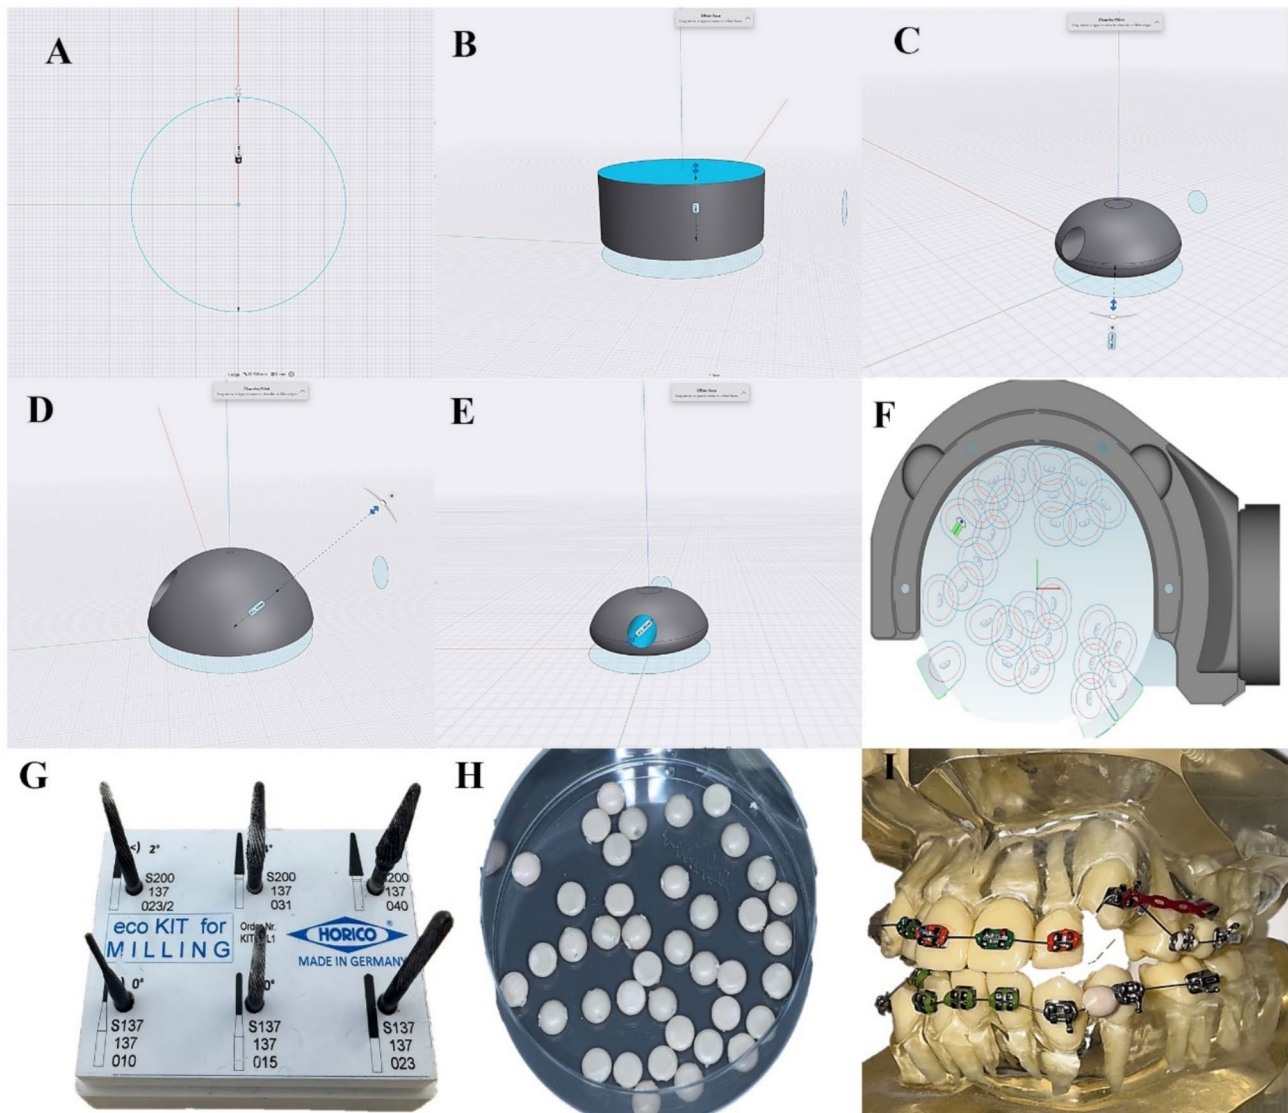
The overall process of designing and milling orthodontic PEEK beads is illustrated. A–E The step-by-step CAD design process for fabricating the beads, while F the milling path simulation used to ensure precision manufacturing. G The milling tools utilized dur-
